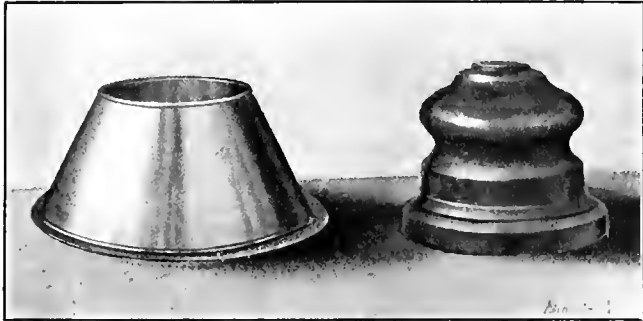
German Silver Reflector Fig. 6. Open-hearth Cold-rolled Steel Shell
